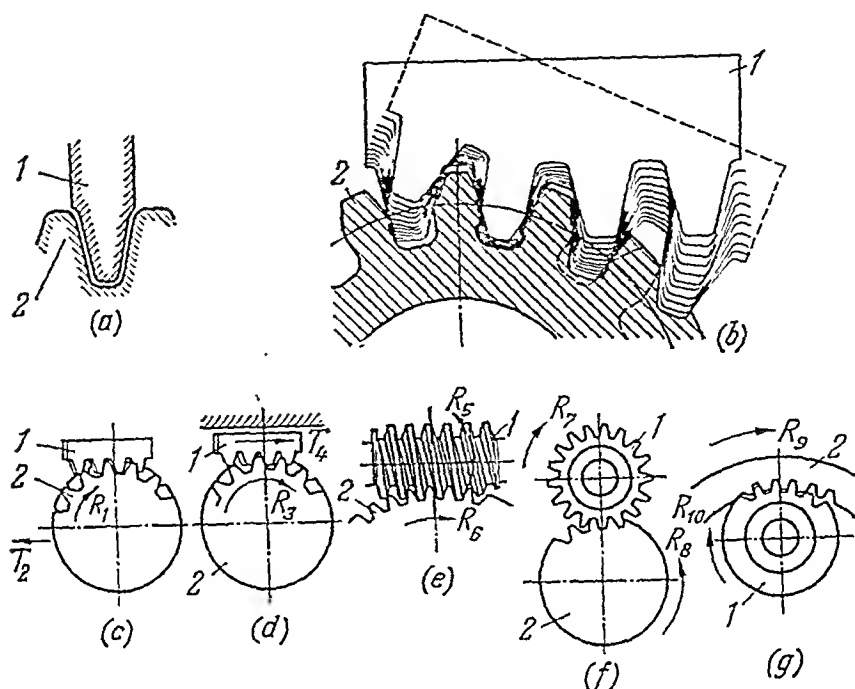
Methods of producing the involute profile of spur, helical and herringbone gears:
